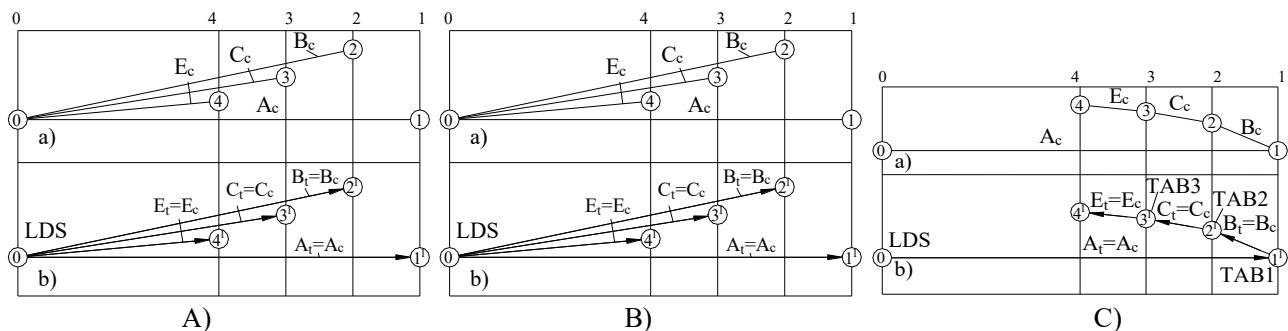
Technological dimensional structures similar to constructive ones [11]: a) “Fan-shaped” type structure; b) “Displaced fan-shaped” type structure; c) “Chain” type structure
